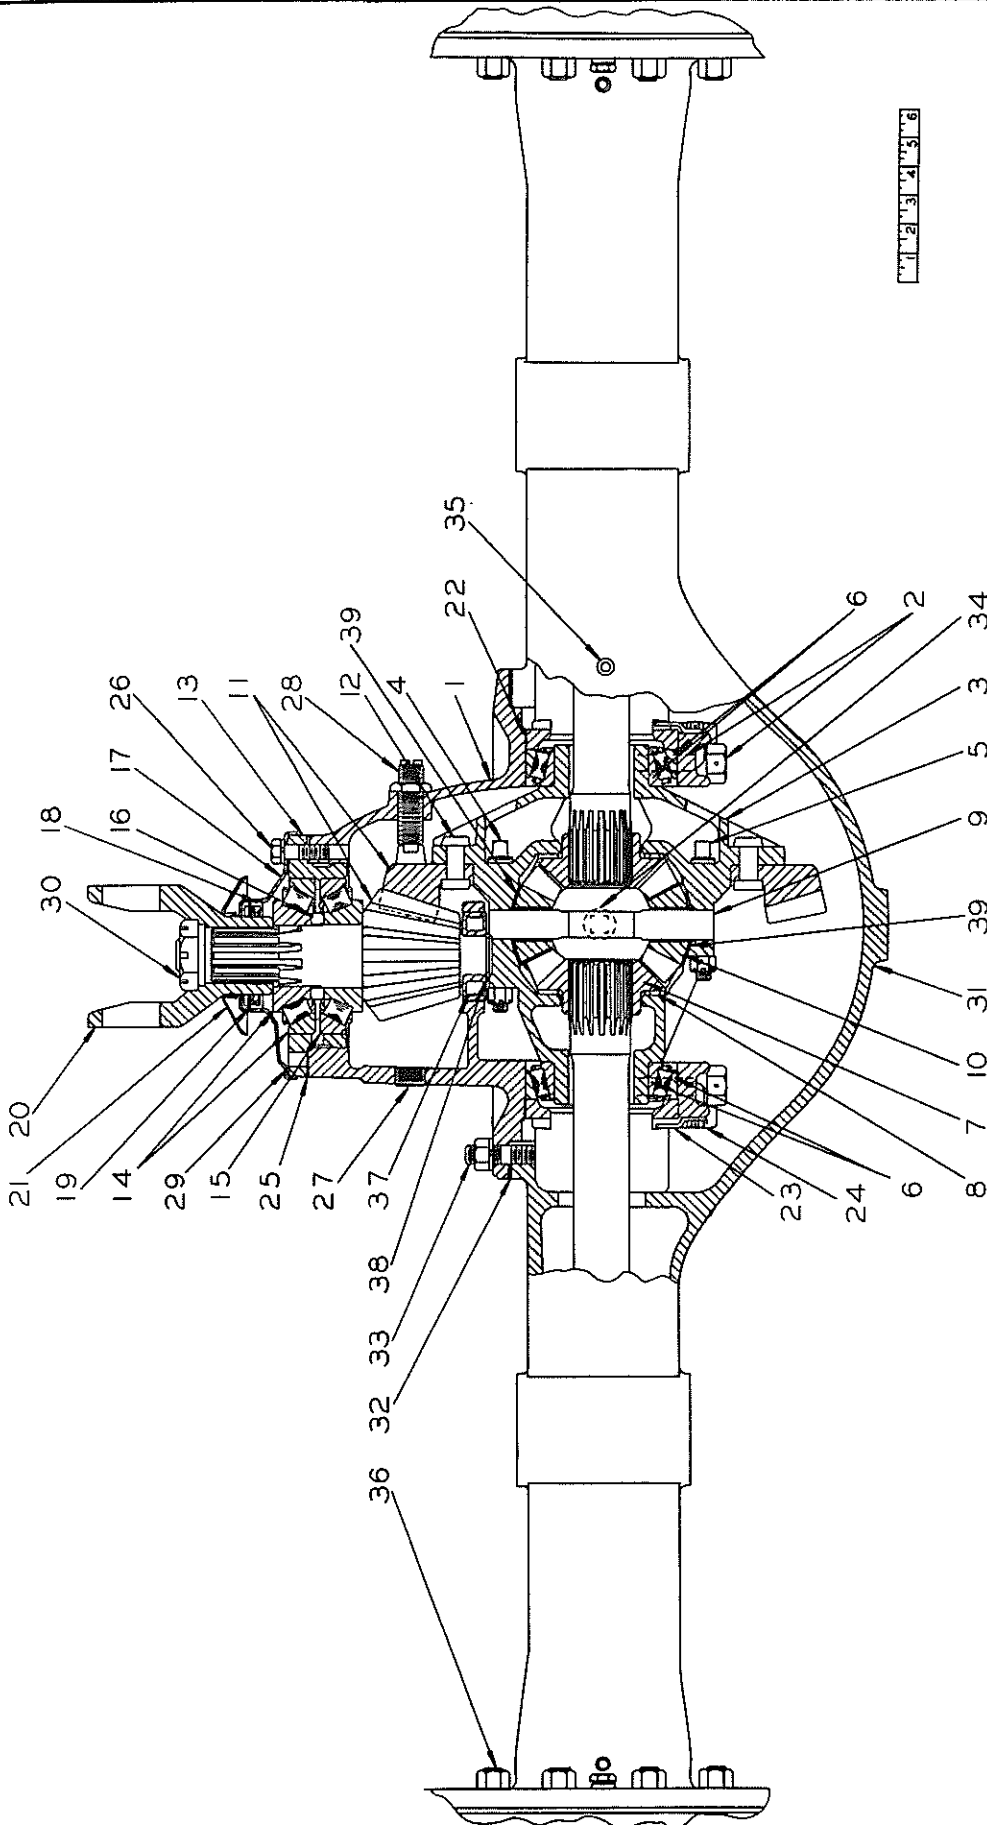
DIFFERENTIAL CARRIER AND HOUSING (FRONT AND STEERING AXLE)
